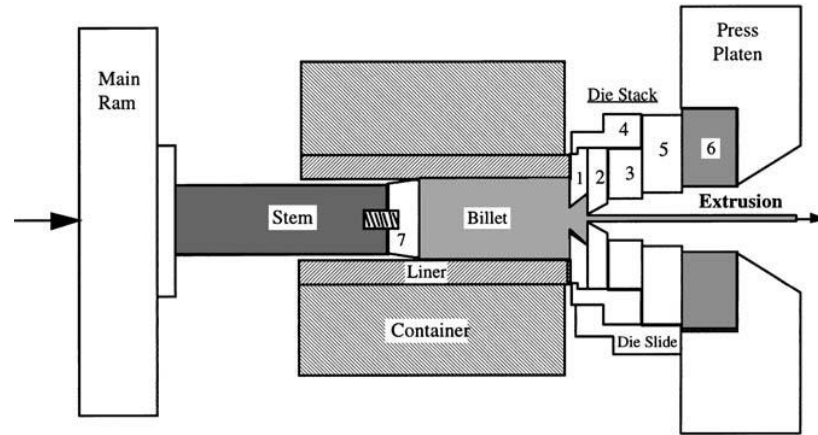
Tooling configuration in direct extrusion process with feeder plate die for softer alloy. 1, feeder plate; 2, die; 3, backer; 4, die ring; 5, bolster; 6, pressure pad; and 7, fixed dummy [18]
